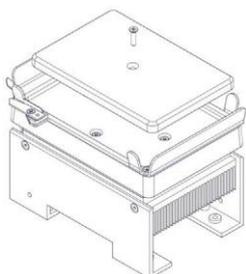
Assemble the plate of flat bottom adapter with 1 screw in the middle.
